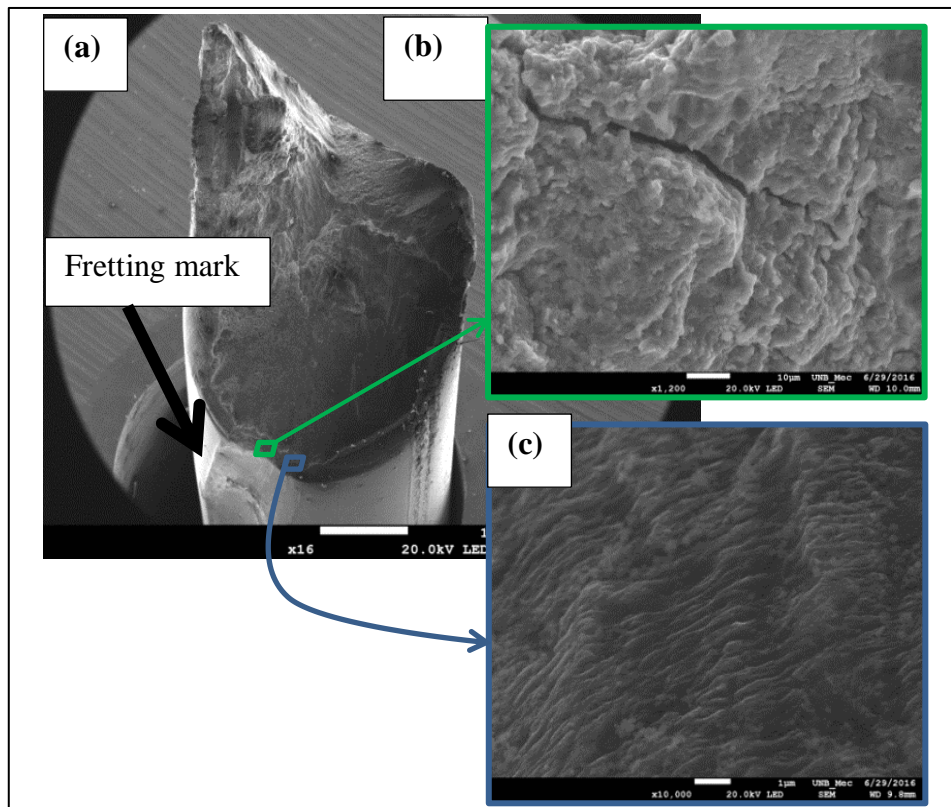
Fracture surface of an ACSR Tern conductor showing (a) the fretting mark, (b) the micro crack and (c) the striations mark.
